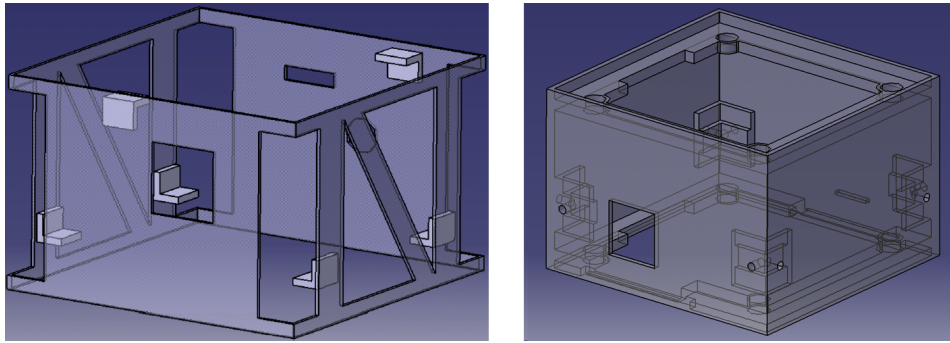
Isometric view of the initial (left) [3] and improved (right) PS cage CAD designs
